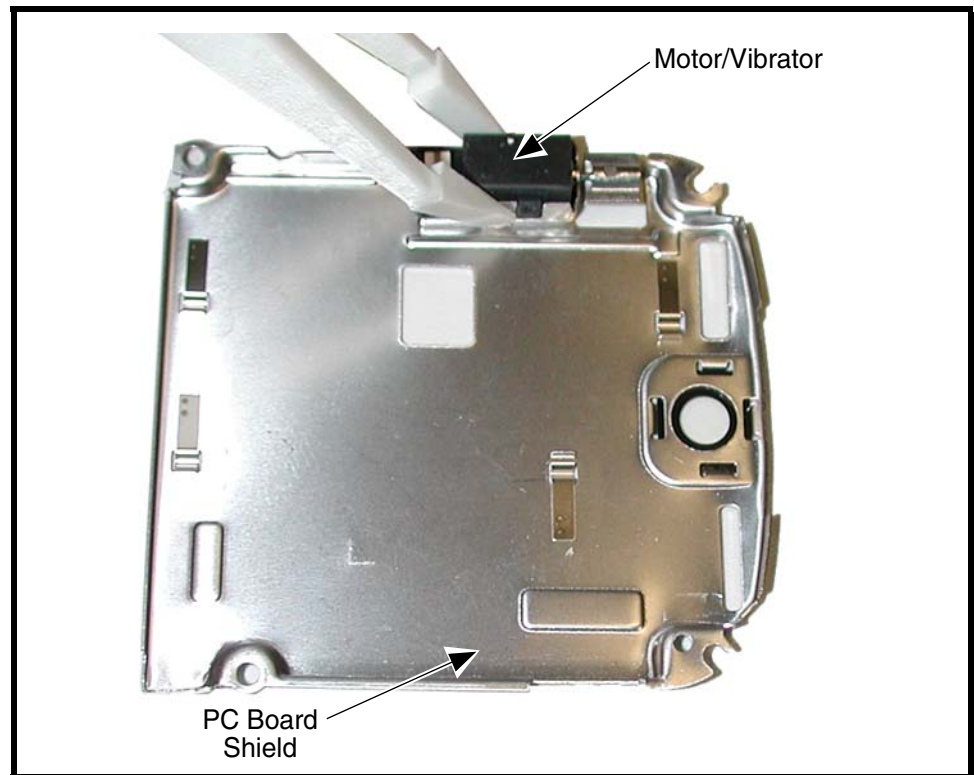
Removing and Replacing the Transceiver PC Board Shield
